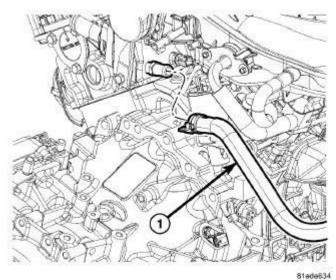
Heater Hose From Engine Coolant Outlet Courtesy of CHRYSLER LLC
